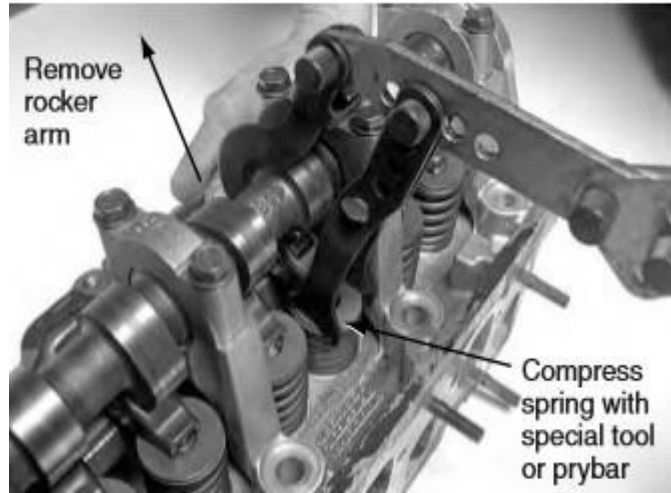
Remove OHC rocker arms before disassembling the valve and spring.
